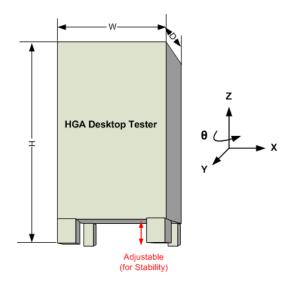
Indicative Dimension for HGA Desktop Tester
